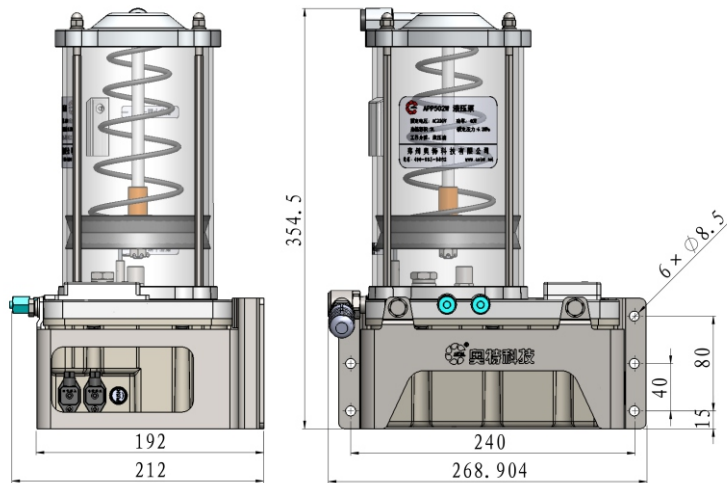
Overall Dimensions and Installation Dimensions of Supply Pump
